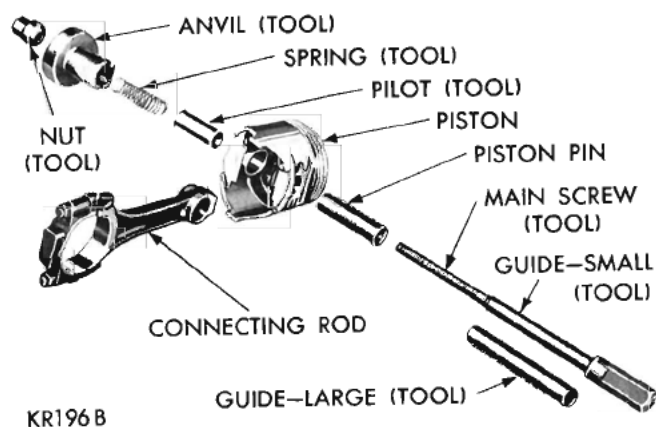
Tool Arrangement for Installing Piston Pin Tool C-3684
